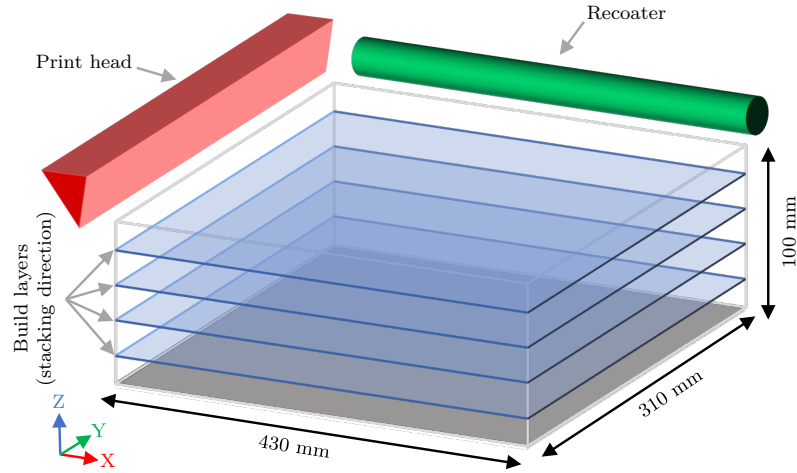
The used convention to define, recoater, print head, and build directions, as well as the utilized print chamber dimensions in this research.
